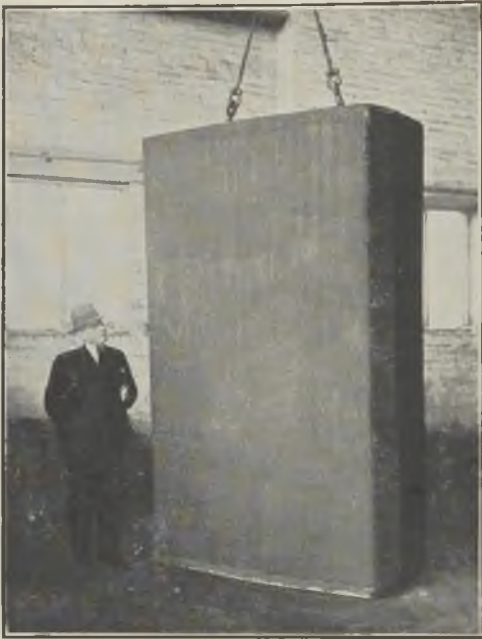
INVERTED MOULD CORE FOR A 34-TON CASTING.
